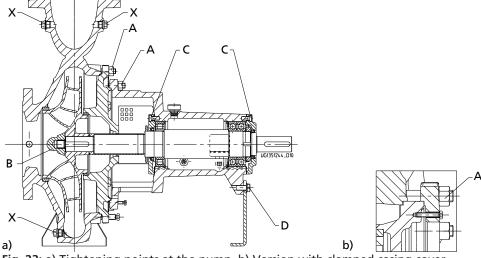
a) Tightening points at the pump, b) Version with clamped casing cover
